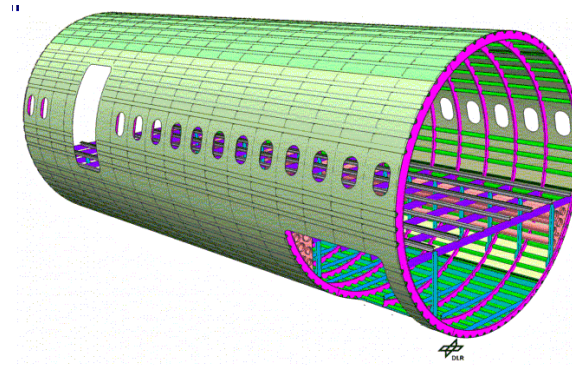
SFB typical section for the first manufacturing and assembly exercise
